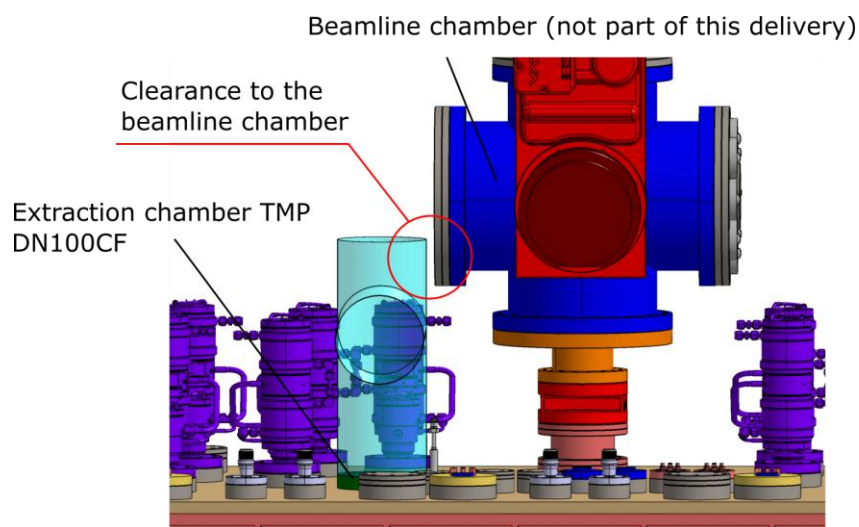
Position of extraction chamber TMP port shall ensure clearance to the beamline chamber
